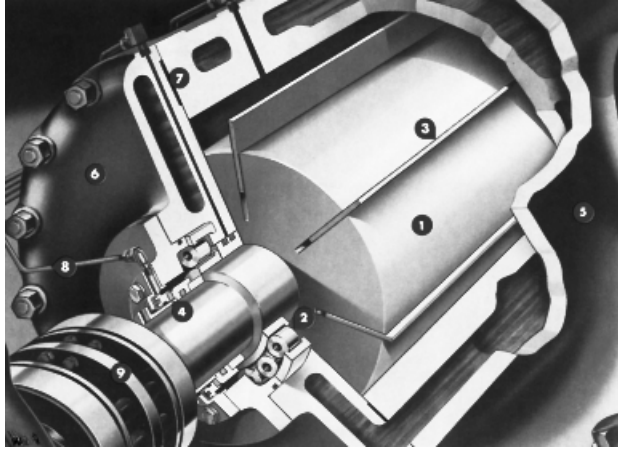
Sliding vane compressor and principal components: rotor and shaft (1), bearings (2), blades (3), mechanical seals (4), cylinder and housing (5), heads and covers (6), gaskets (7), lube supply line (8), coupling (9). (A-C Compressor Corporation, Appleton, Wis.)
